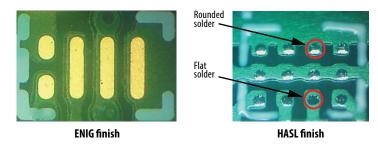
ENIG finish versus HASL finish showing uneven solder heights.
